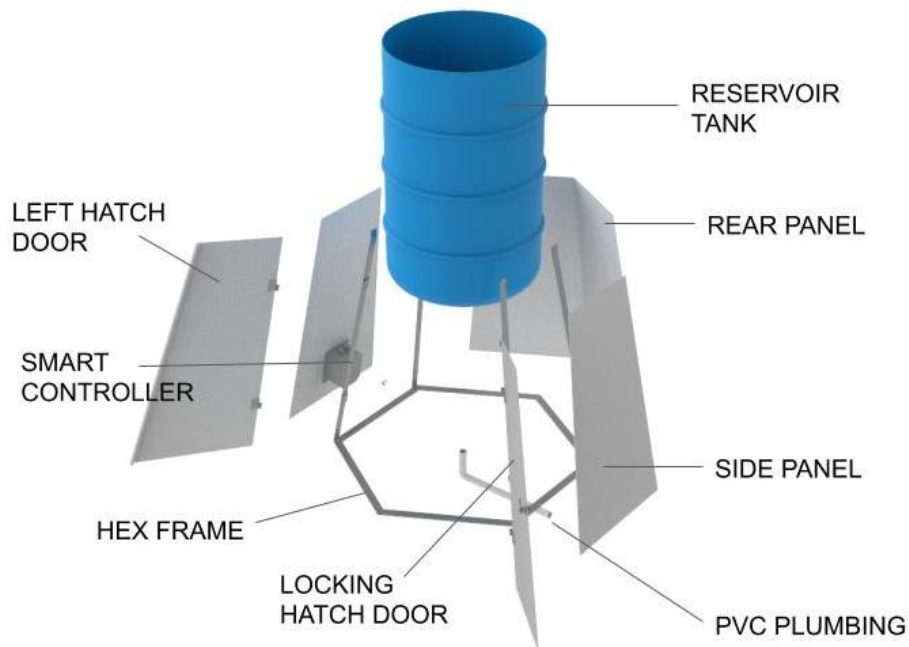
Exploded view of bottom module [Martinez 2020]
